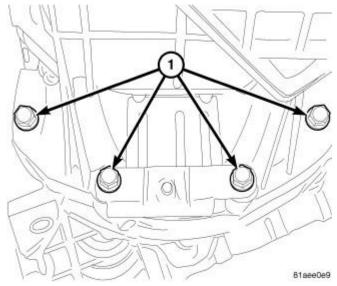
Oil Pan Bell Housing Bolts Courtesy of CHRYSLER LLC
